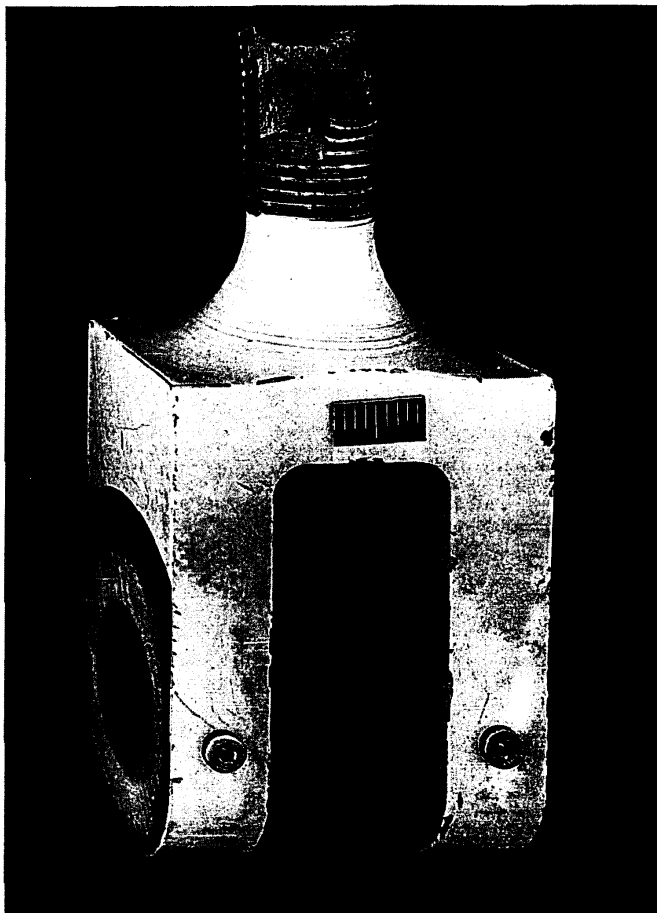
General view of the broken L/H clevis rod from the aircraft reg. LN-MOE. The machined groove in the one side of the threaded portion is seen at the top of the photo.
